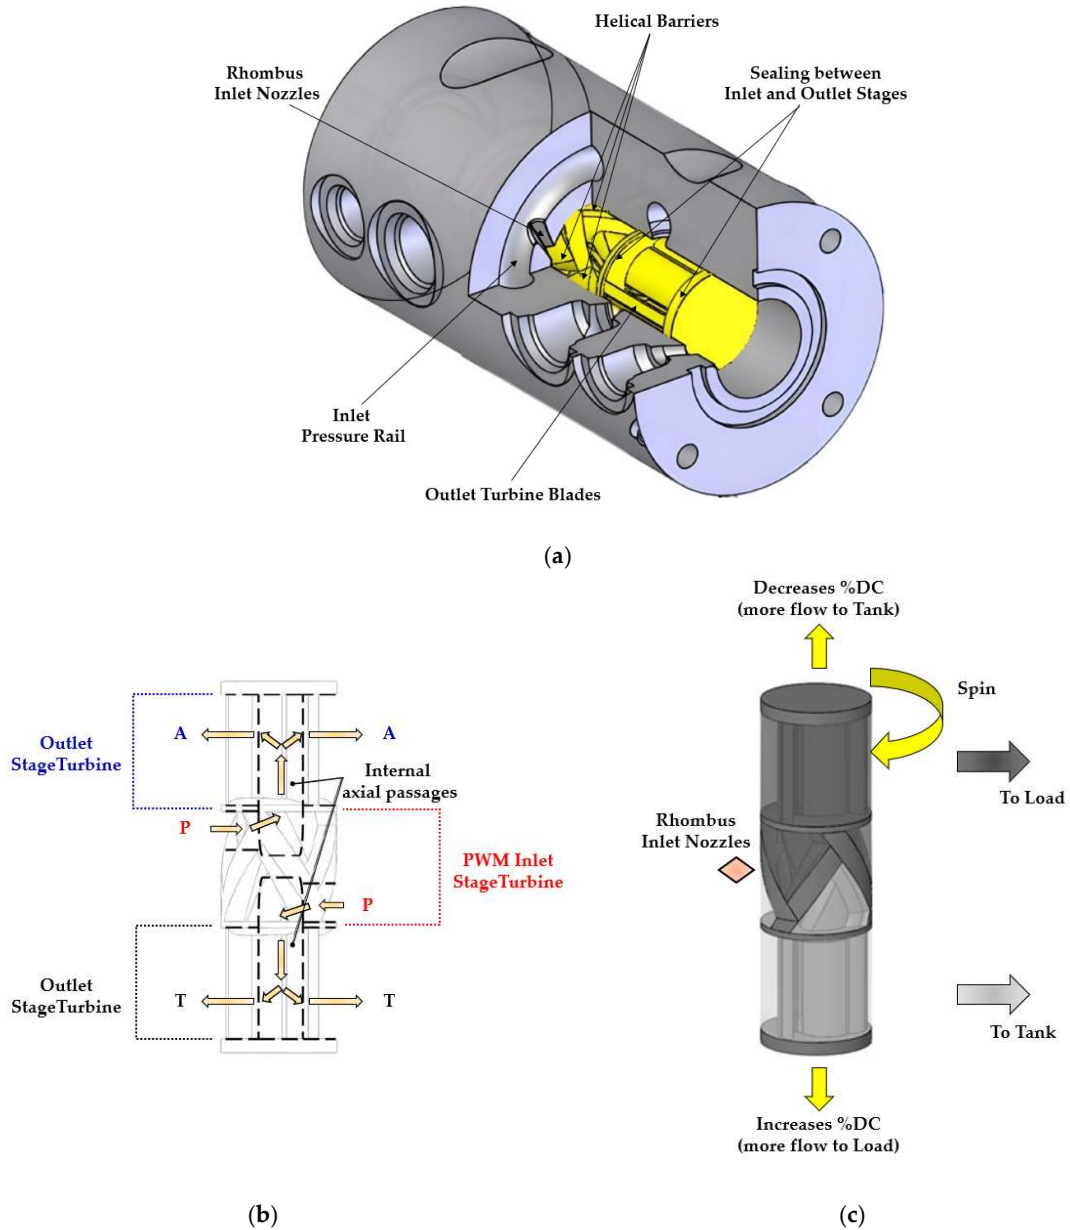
Redrawn schematic representation of the self-spinning rotary 3/2 HFSV proposed in [183]: (a) Cutaway illustration of spool and sleeve assembly; (b) Internal geometry of the spool; (c) Schematic representation of the rotary spool.
